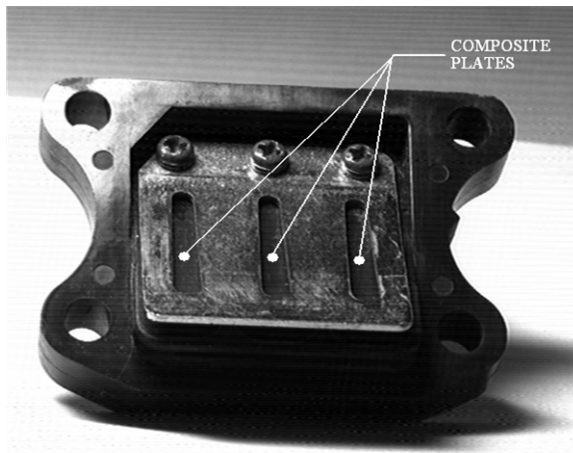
An inlet-valve cover consists of three CFRP plates was used on a 4-stroke motorcycle engine [1]
